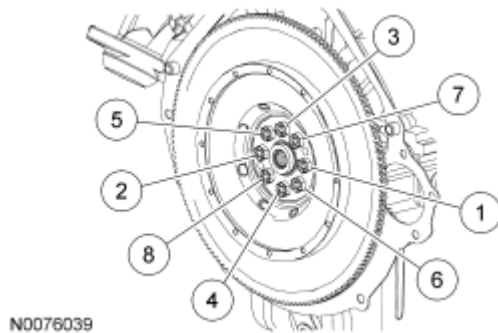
Tightening Flywheel Bolts Evenly In Sequence
